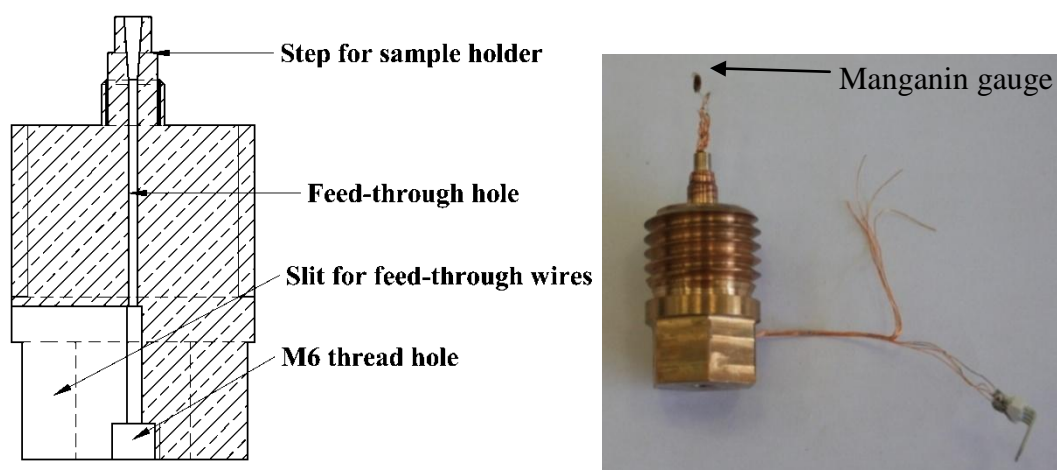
(a) Section view of the plug, (b) Single piece plug with a manganin gauge mounted.
